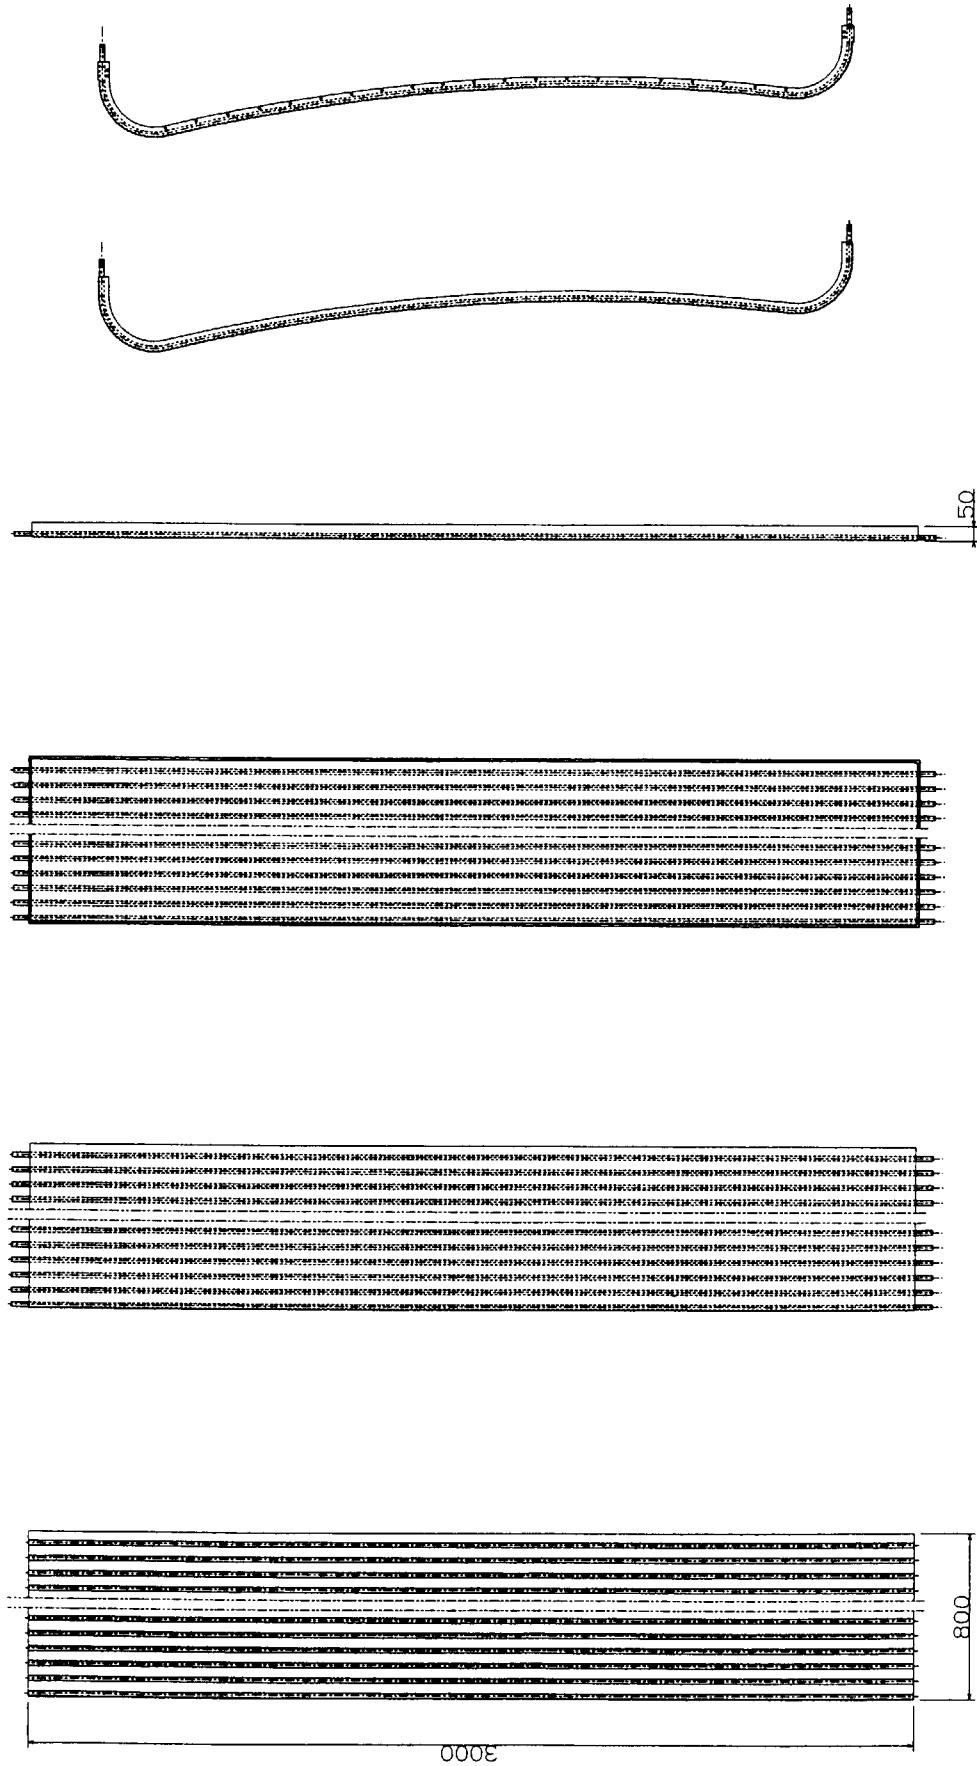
Fabrication Process of Heat Sink (Type A)
